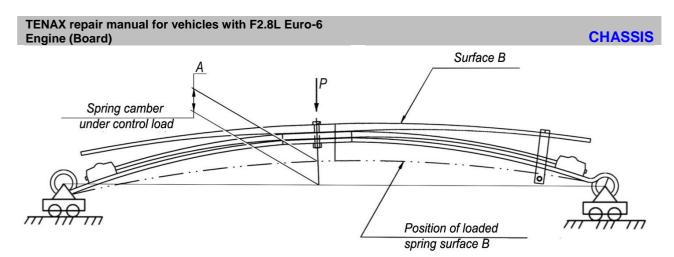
Diagram for checking camber of rear spring removed from vehicle: P - control load
